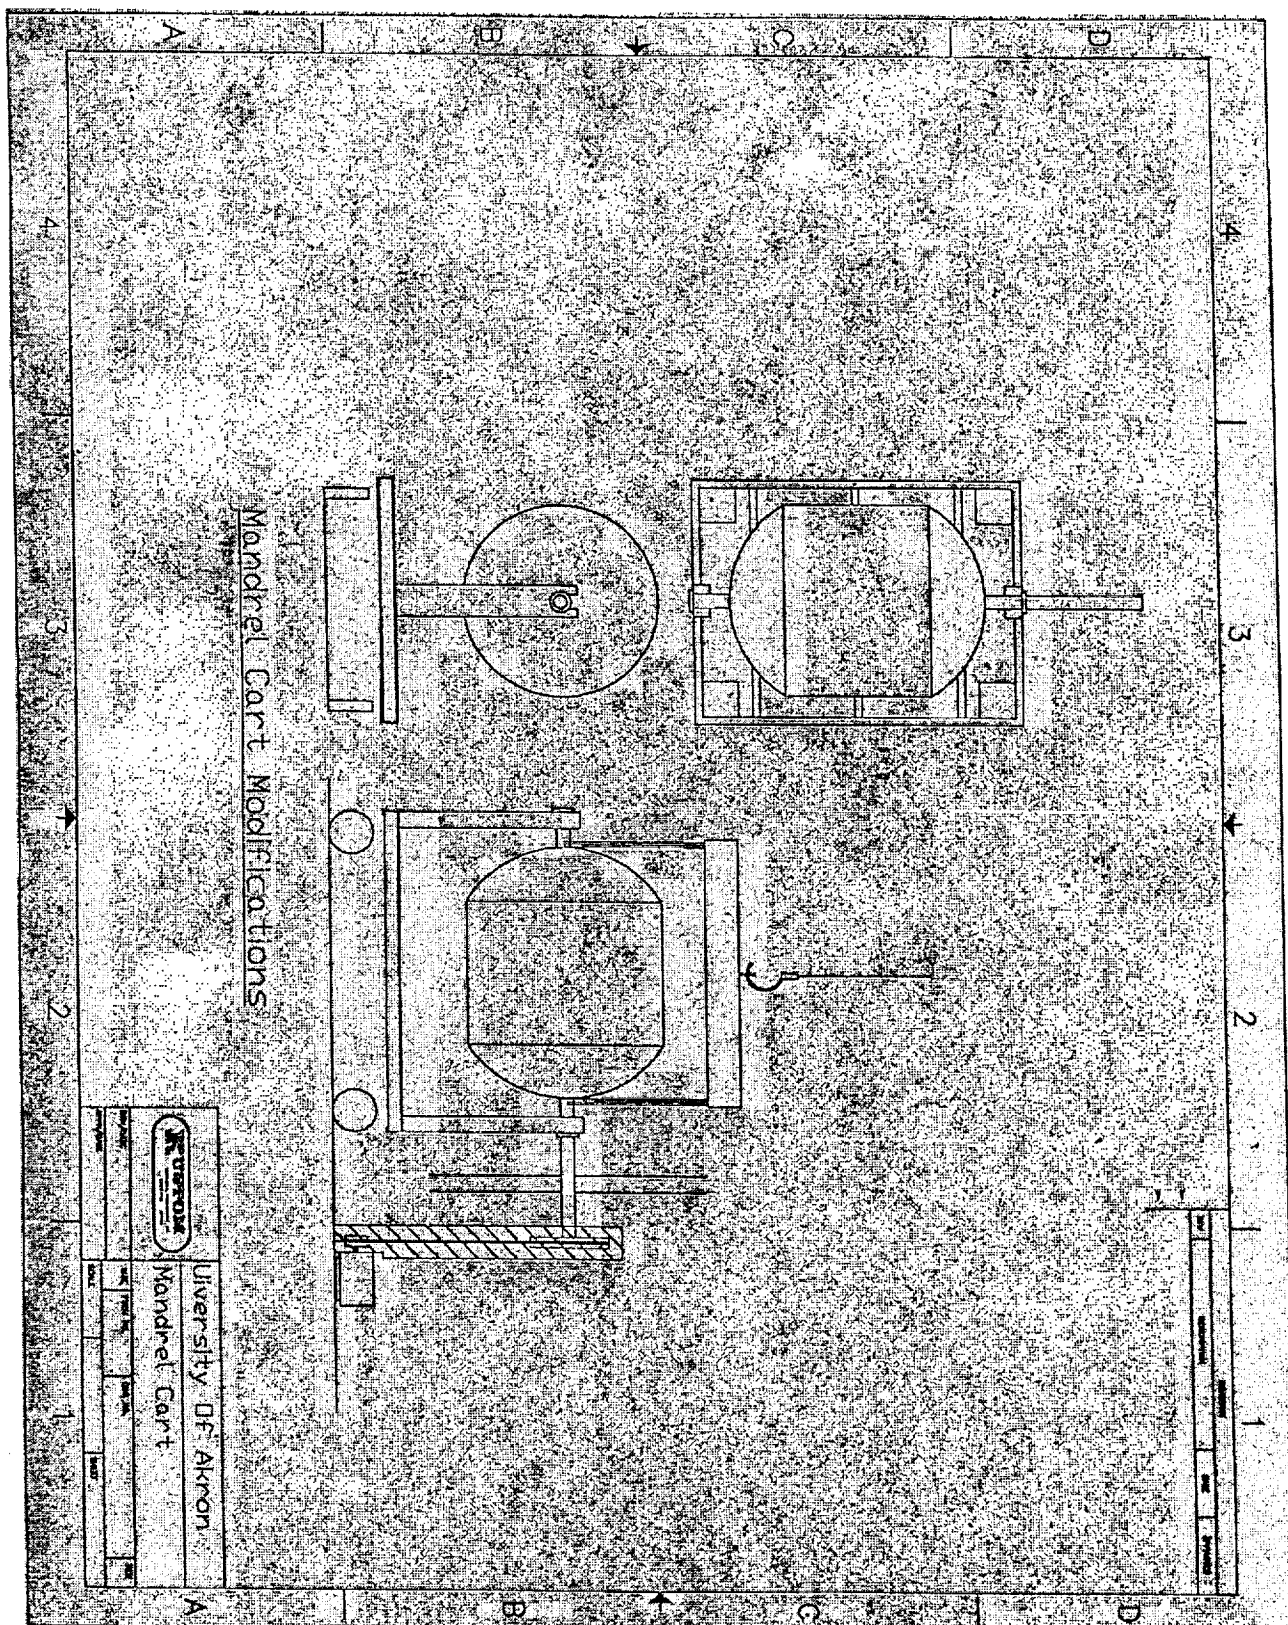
MANDREL CART AND THE ROTATING SYSTEM
